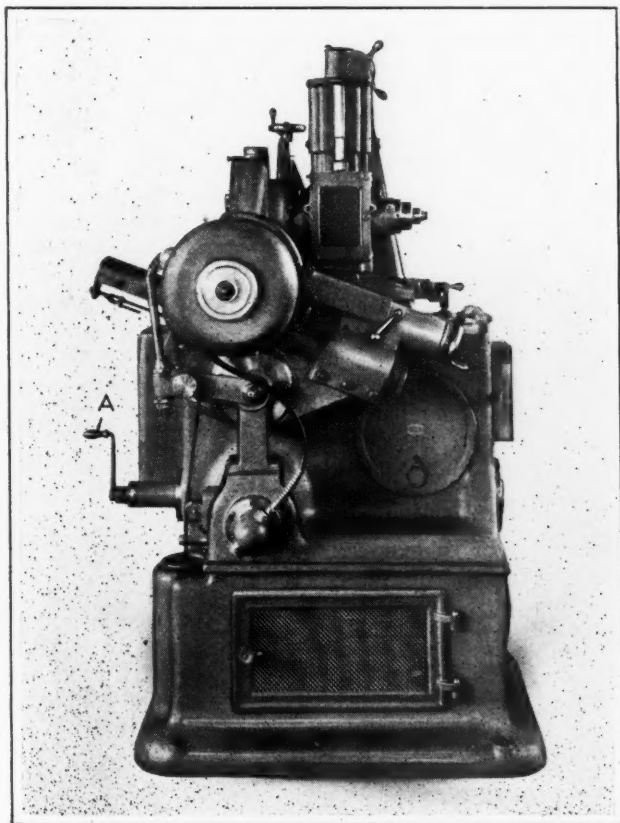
National-Cleveland Gear-tooth Grinding Machine
